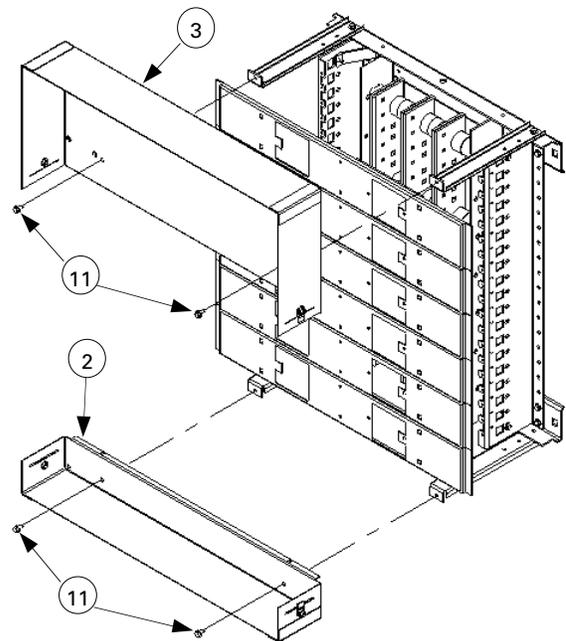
Installing the dead front load and line ends to the mounting posts. Note that a top-feed installation is shown; reverse [2] and [3] for bottom feed.
